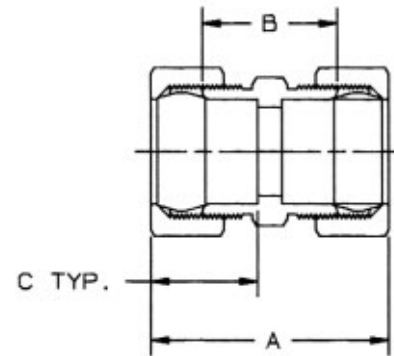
Dimensions — Weight — Packaging — Price
